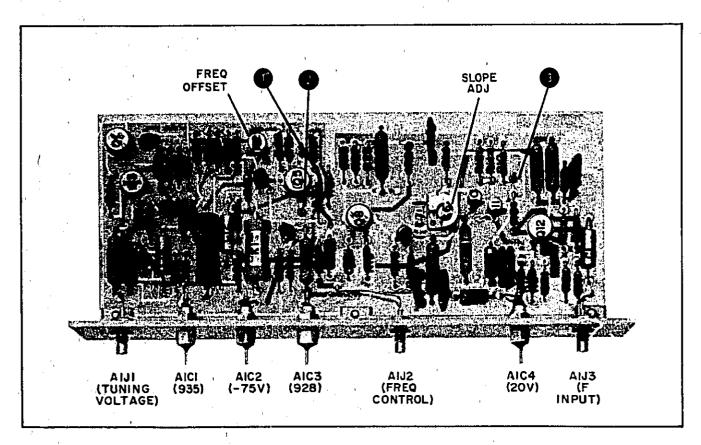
Component Identification A1A1 Discriminator Assembly (Part of Change 3)
